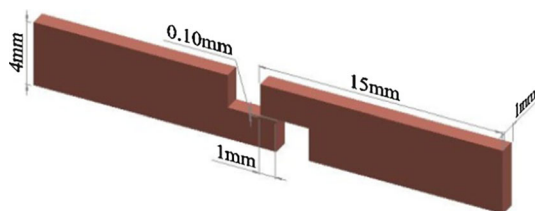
Schematic of fabrication of shear-lap solder joint specimen
